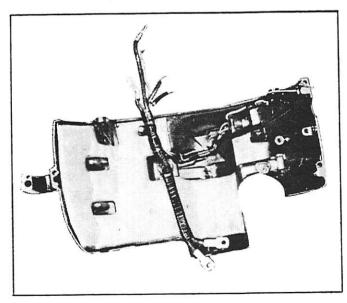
Mark 25E Cowl, Left Side Electrical Harness - Reassembly
